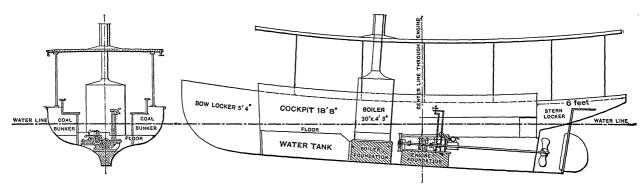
Cross and Longitudinal Section of Steam Yacht "Vena."
